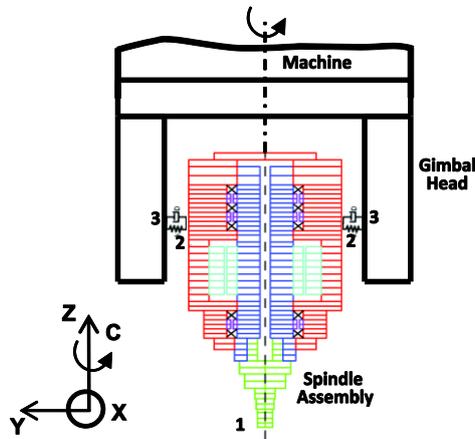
Schematic of the spindle assembly connected to the gimbal head of the virtual machine
